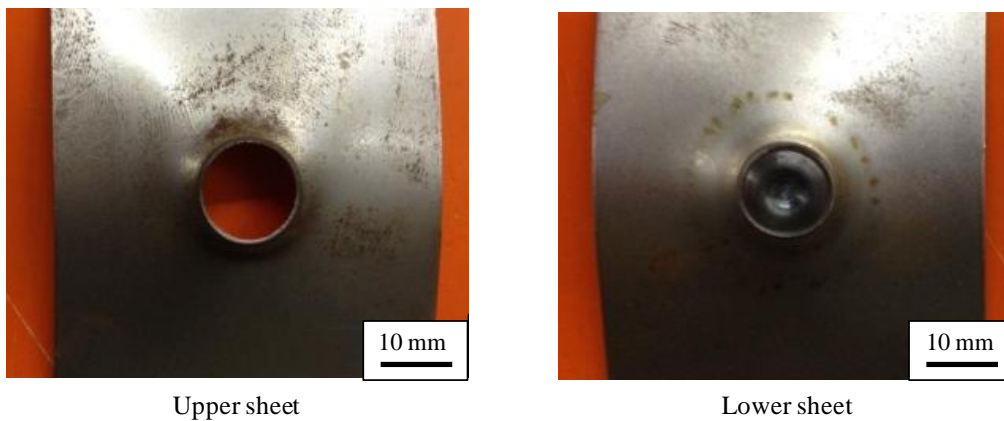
The fracture of welded joint after tensile test.
